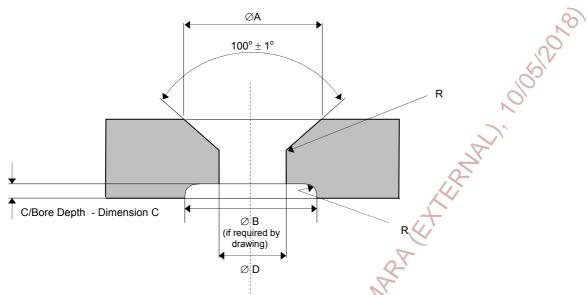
Panel hole geometries for stud installation into metallic panels
